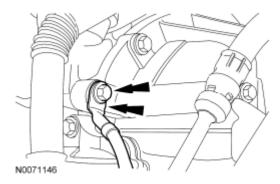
Locating Engine Ground Wire And Bolt Courtesy of FORD MOTOR CO.
